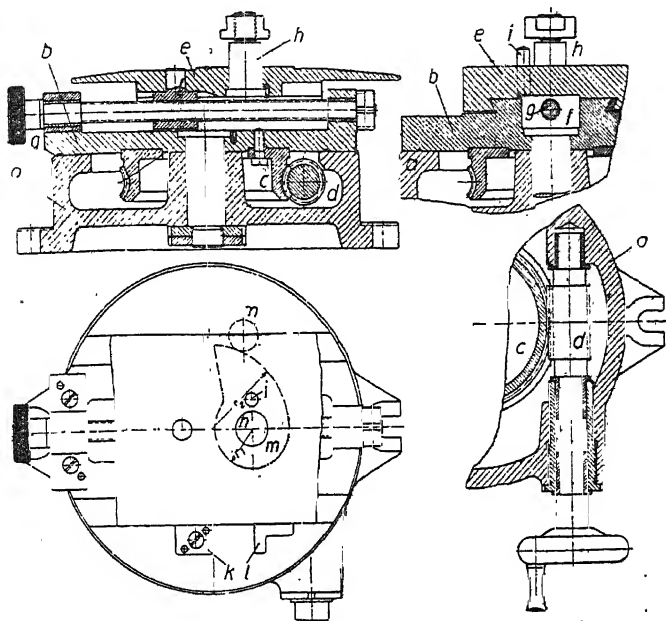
Fixture for milling radii on a feed-cam for automatic drilling machines: *a*, base; *b*, rotatable table; *c*, worm-wheel; *d*, worm operated by hand-wheel; *e*, slide mounted on table; *f*, moving nut; *g*, screw spindle; *h*, reception pin for workpiece *m*; *i*, pin for the location of workpiece *m*; *k*, set-edge on *b*; *l*, set-edge on *e* (between *k* and *l*, gauge blocks are placed to determine the exact lift); *m*, workpiece (open cam); *n*, end mill.
